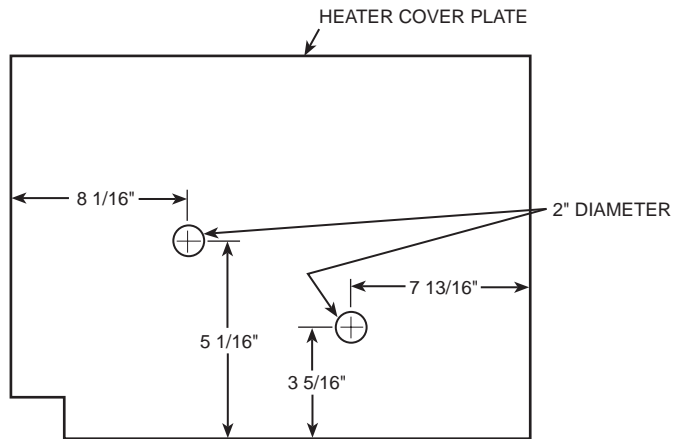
Electric Heater Cover Plate, Water Supply Access Details
